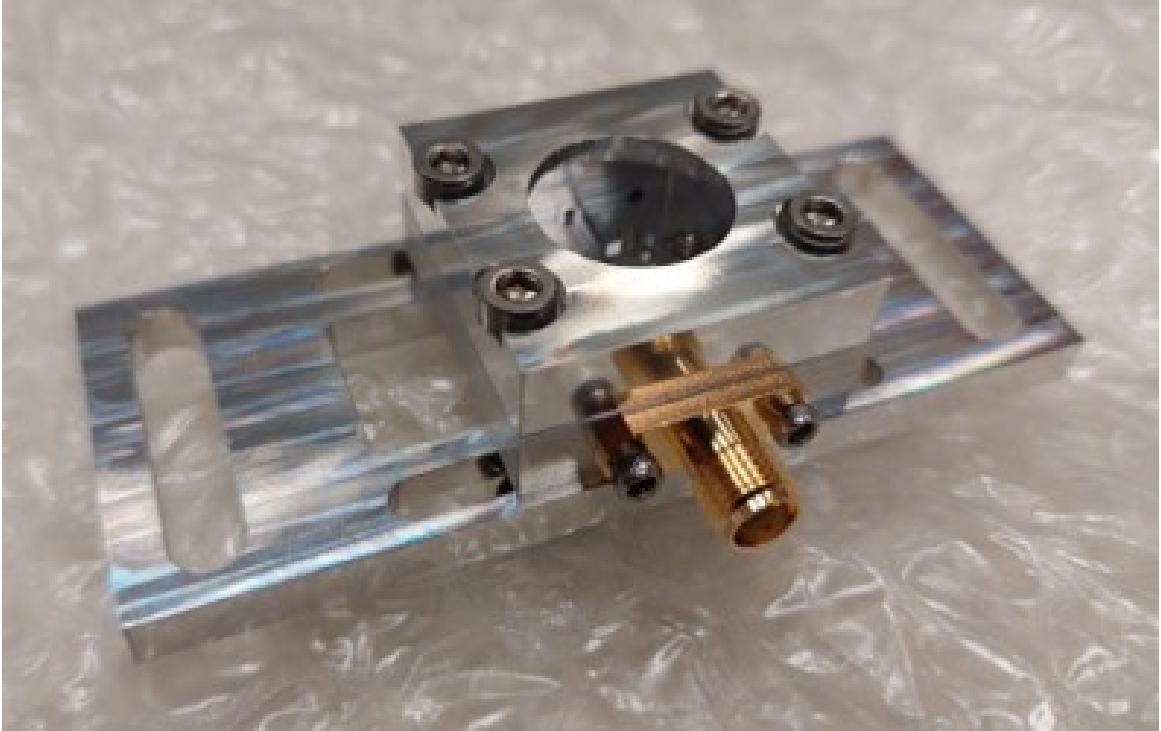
Final machined test box assembly. The device allows for up to seven optically-coupled and multiple dark pixels.
